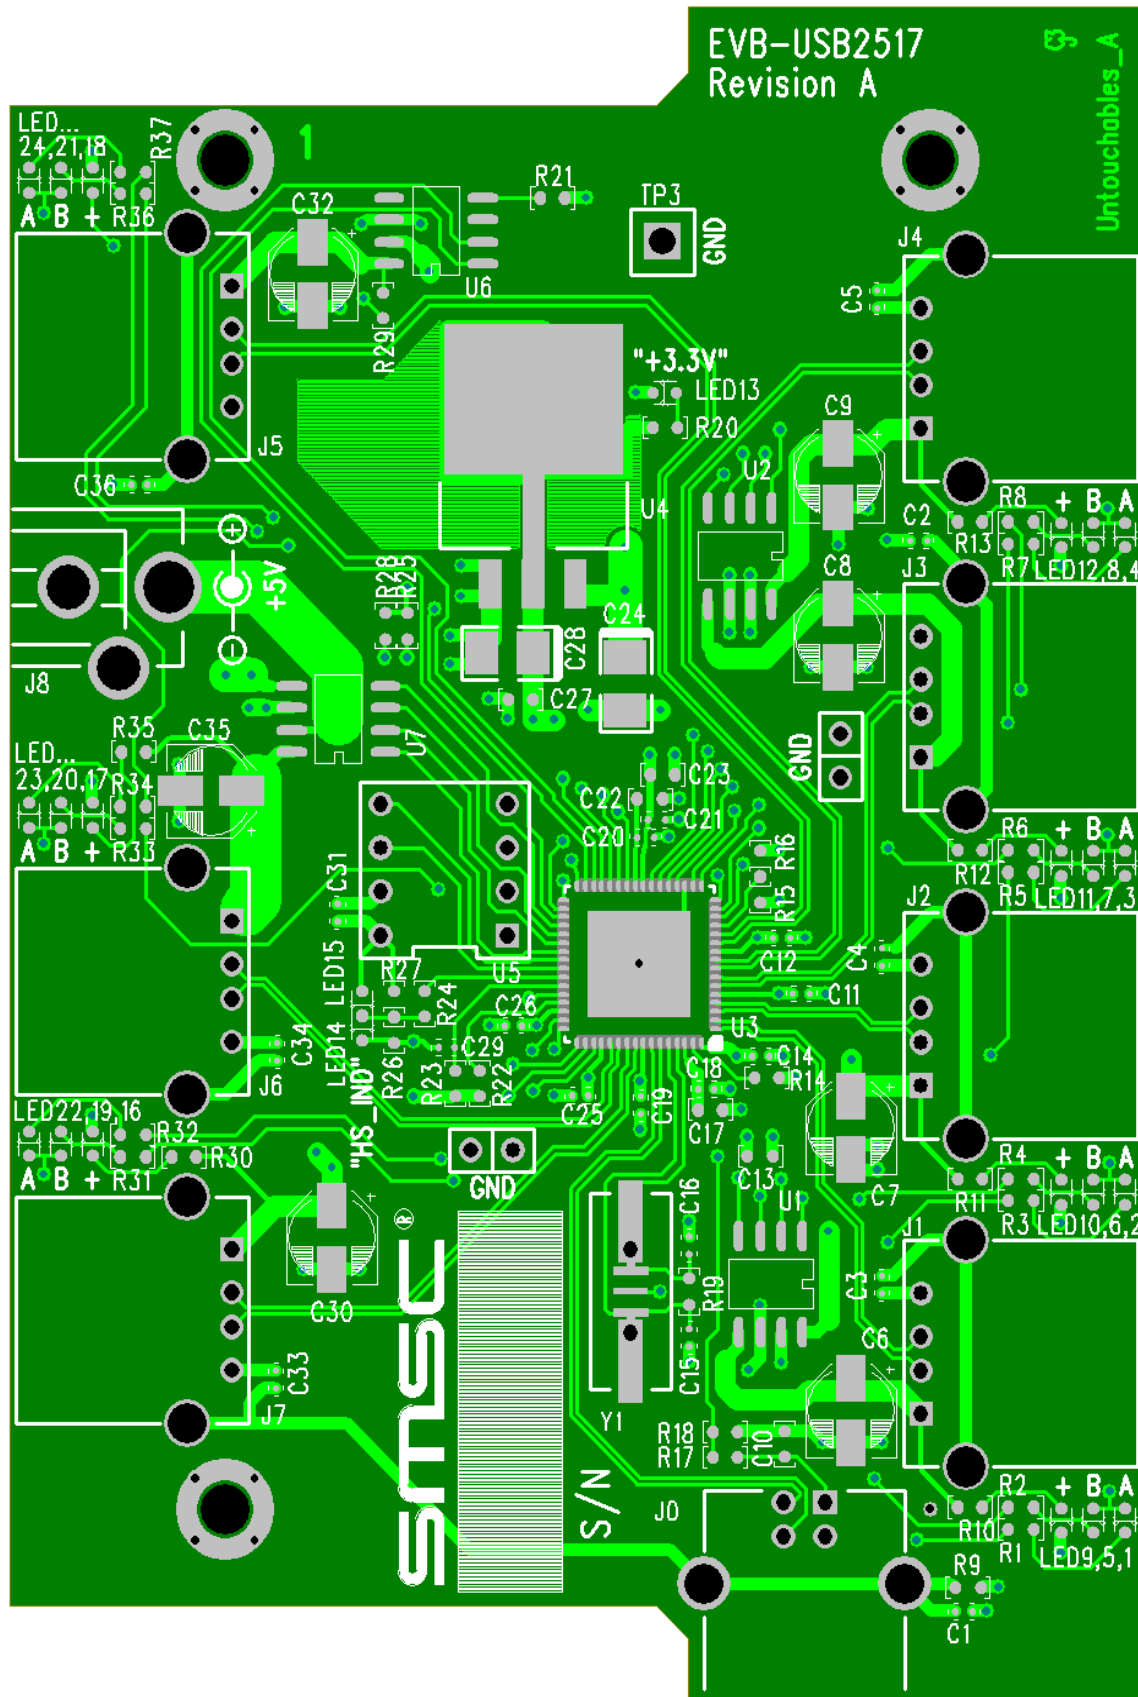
EVB-USB2517 64-Pin Component Side Top Layer
